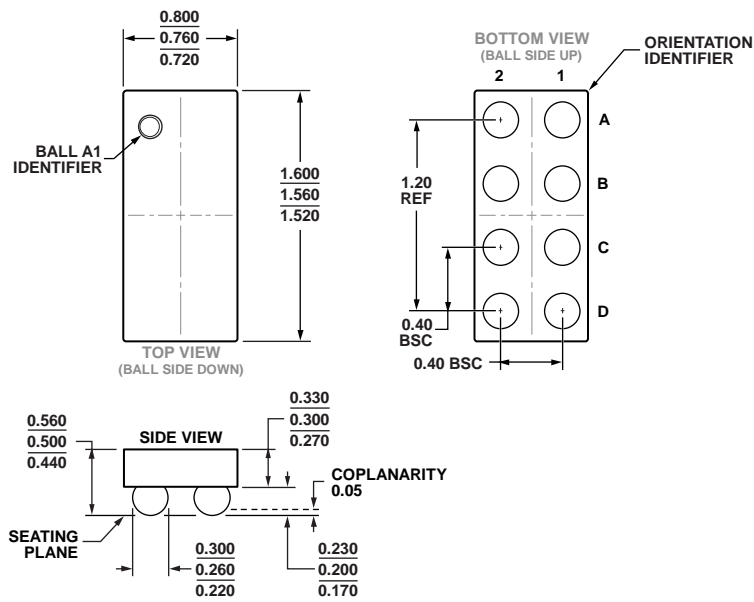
8-Ball Wafer Level Chip Scale Package [WLCSP] (CB-8-6)
